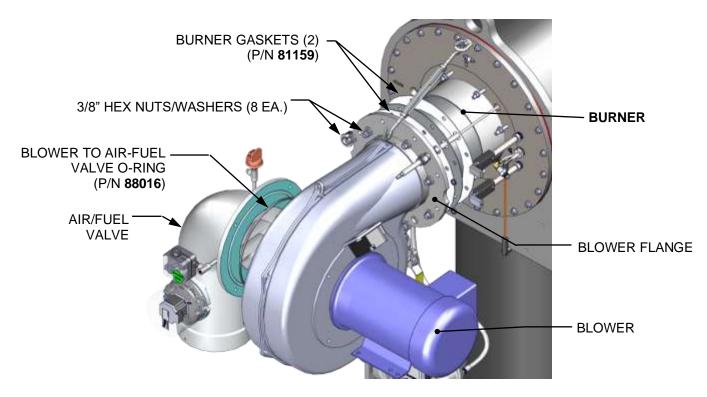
Burner Assembly Exploded View – BMK5000 & 6000
